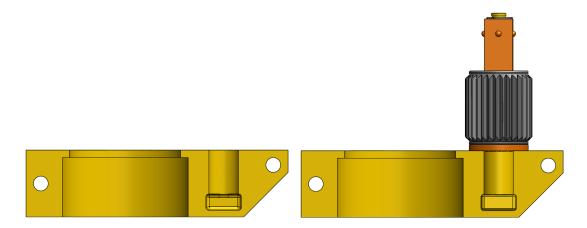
Counter gear clamp, section view (lhs) Figure 51: Counter gear system, section view (rhs)
